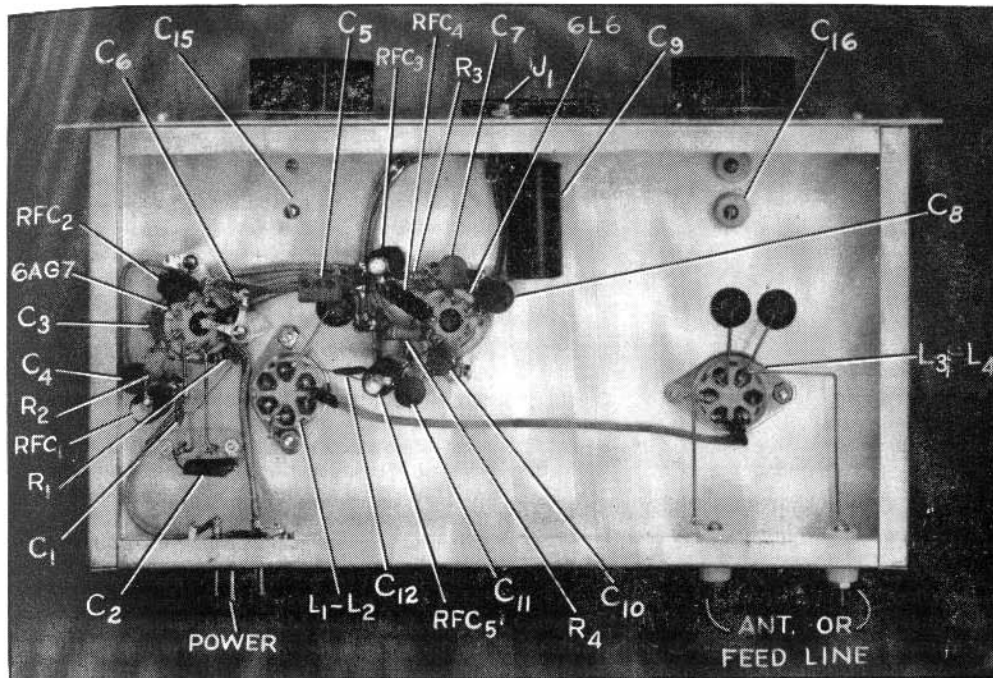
Bottom view of the two-tube low-power transmitter. The chassis measures 7 by 13 by 2 inches.
